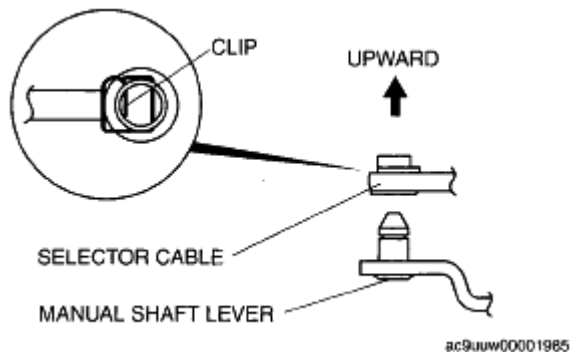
Identifying Selector Lever To Manual Shaft Lever
